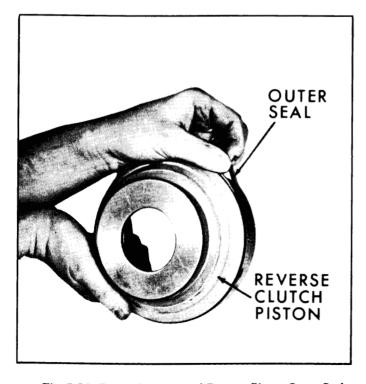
Removing Low and Reverse Piston Outer Seal
